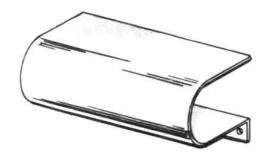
Phase Crank Shield for 15kV back-connected jaw.
